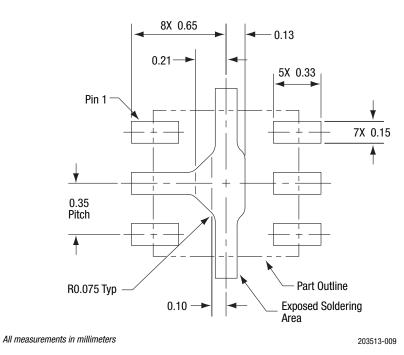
SKY13592-689LF PCB Layout Footprint (Top View)
